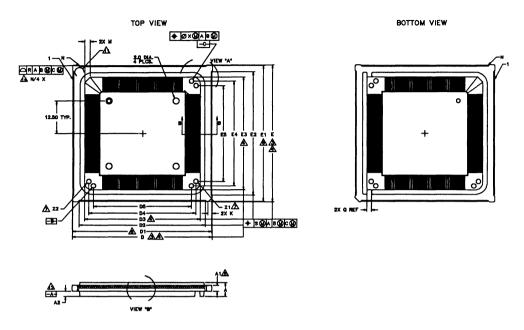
Molded carrier ring QFP, 208-lead customer package outline (2 of 4)
